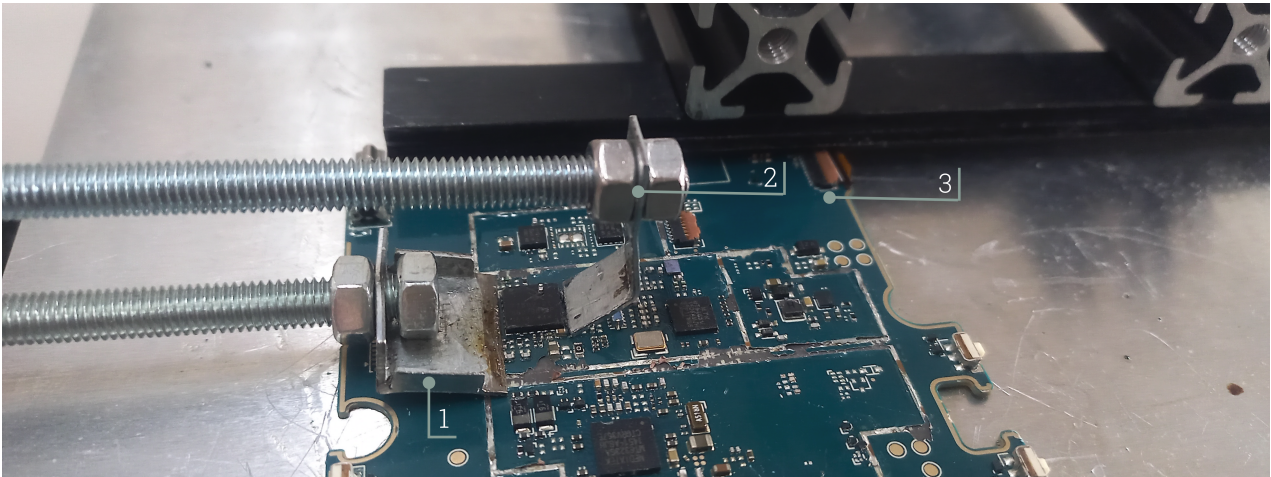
Grasping parts of Prototype 2 of the designed tool. (1) receiving part that also applies the extraction force, (2) the end part that ensures that the grasping process is performed, and (3) the mobile phone's PCB.
